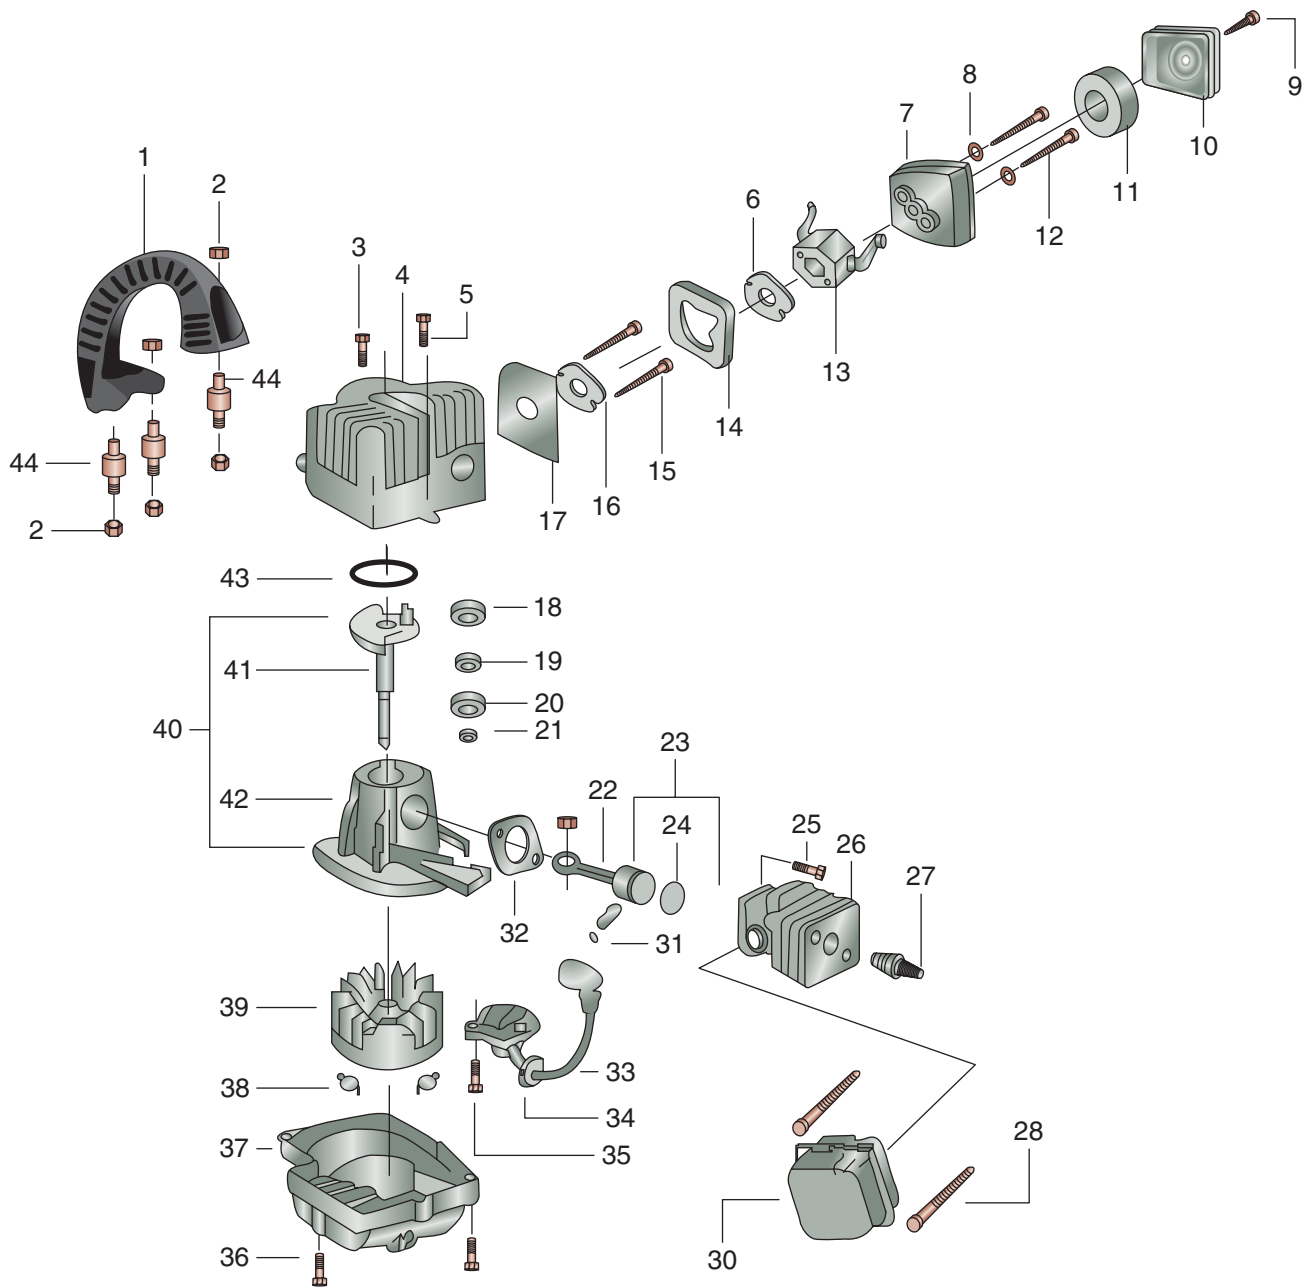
The components of a typical two-stroke engine in exploded view format.
